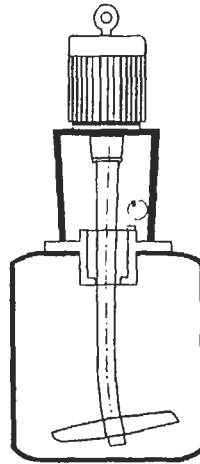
Mixer shaft "orbiting," i.e., operating with excessive runout.
